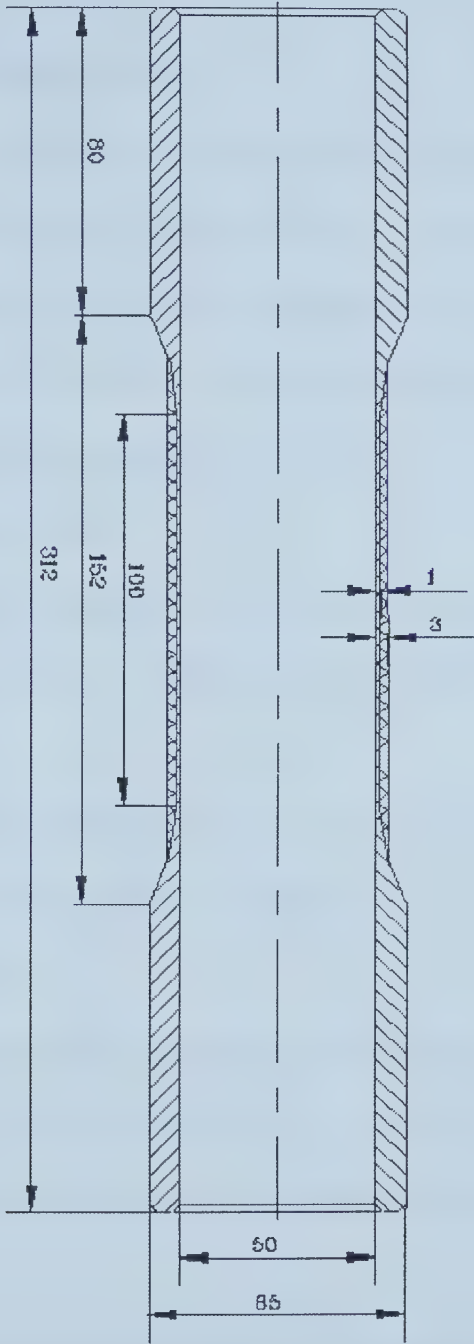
Drawing of the hybrid composite/steel specimen (Unit: mm)
